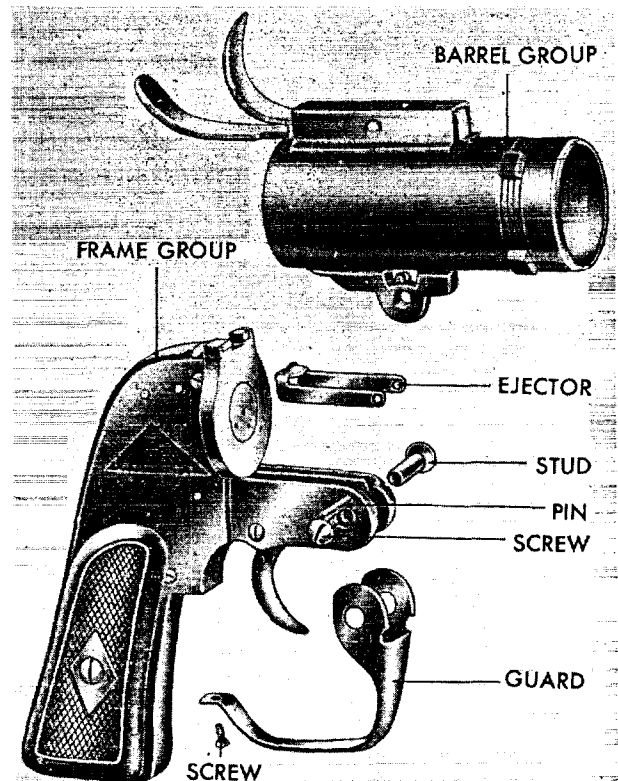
Pistol, Pyrotechnic, AN-M8, Disassembled
